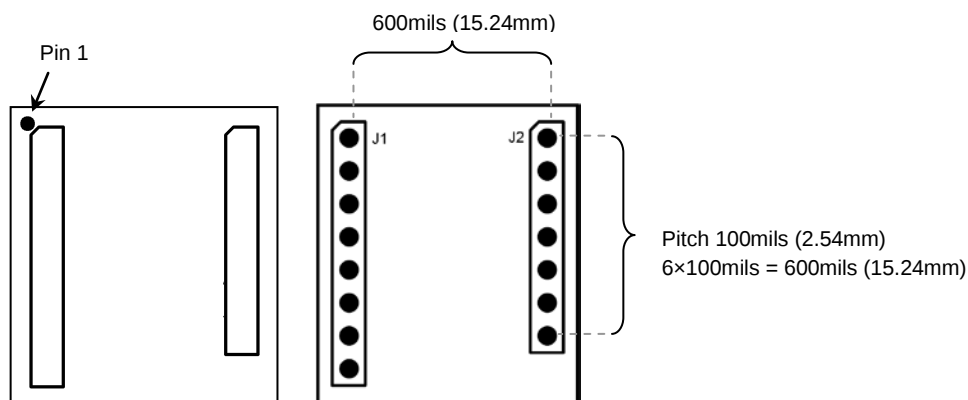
Assembly drawings for CMR3000-D0X PWB and CMR3100-D0X PWB.
